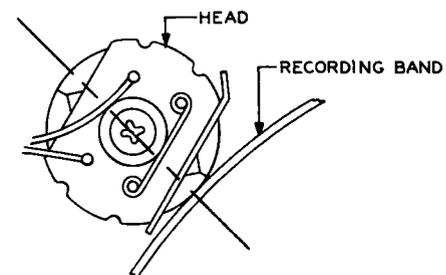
C - INCORRECT ALIGNMENT (HEAD ADJUSTMENT SCREW TURNED IN TOO FAR)
